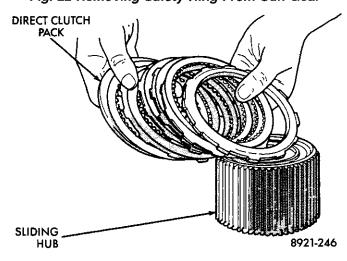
Removing Sliding Hub And Direct Clutch Pack
